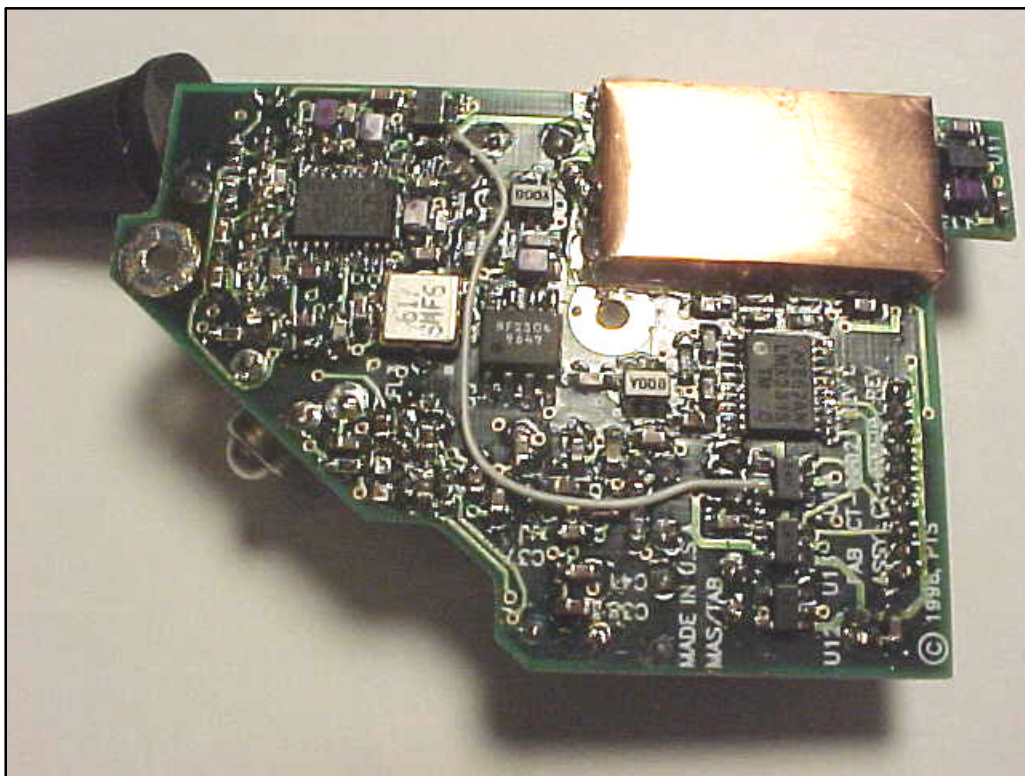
RF Board, Bottom View, PAD-1000, Modified
